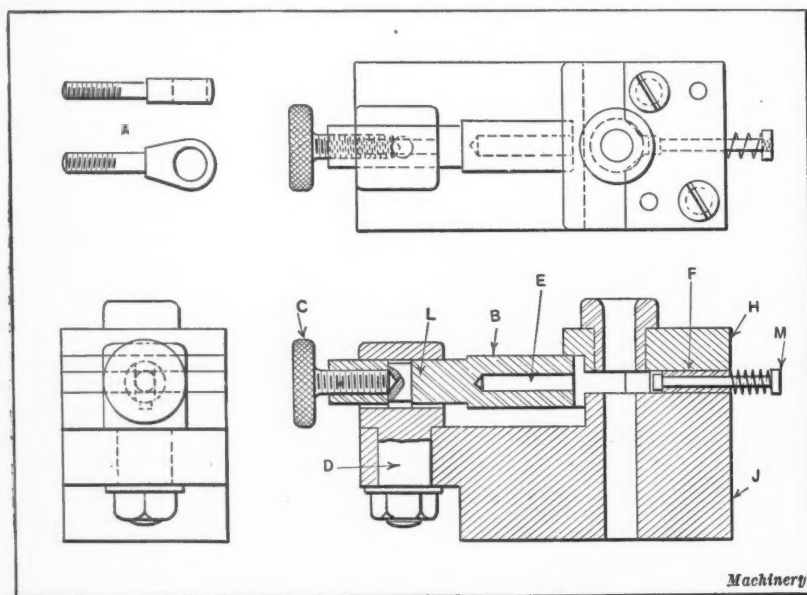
Design of Jig which insures Proper Location of the Hole in Eyebolt A
